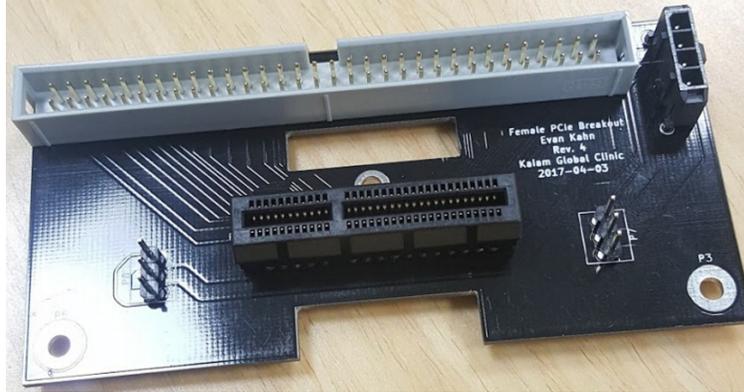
The female PCIe breakout PCB with the PCIe connector and power connectors for the shell on the bottom. The connectors on top go to the control PCB.
